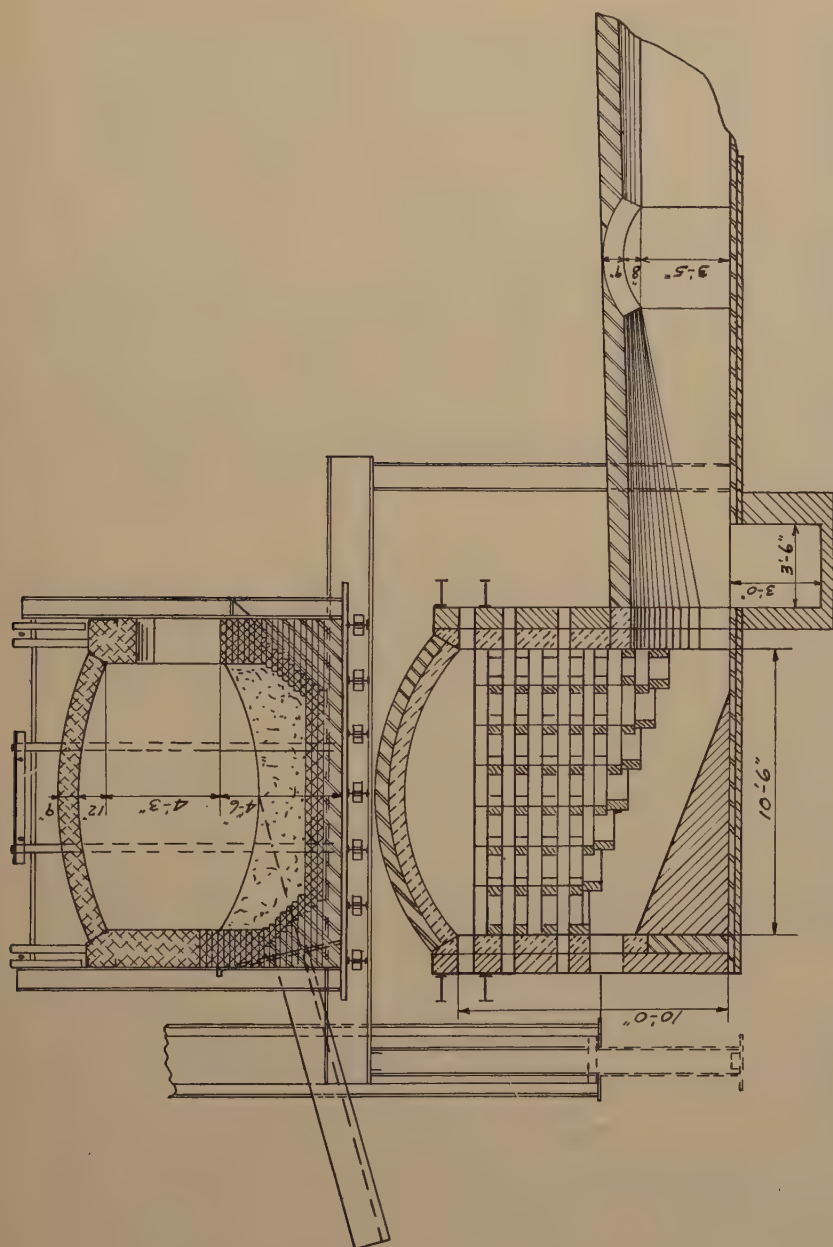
CROSS SECTION OF OPEN-HEARTH FURNACE SHOWING ARRANGEMENT OF CHECKERS, BOTTOM SLOPE AND PIT TO CATCH HEAVY DUST.
